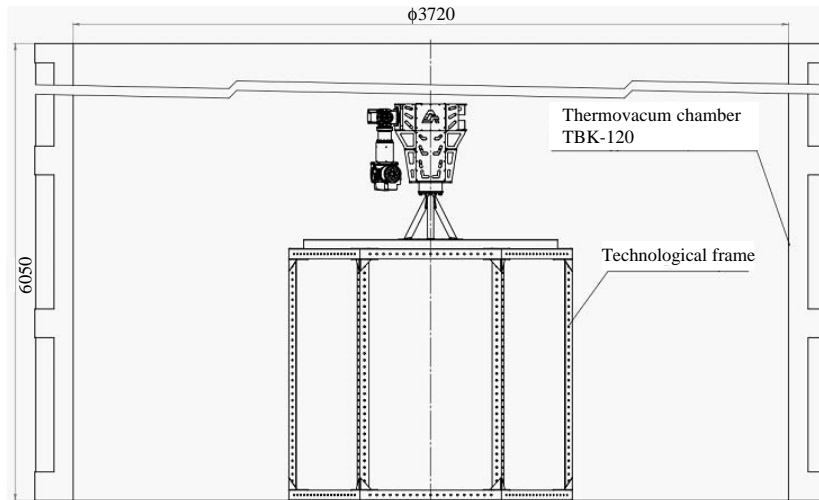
RAT layout in the thermo-pressure chamber TPC-120
